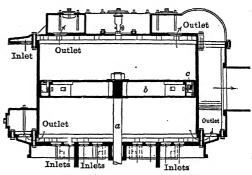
Details of blast cylinder, 84-in. diam., 60-in. stroke.
